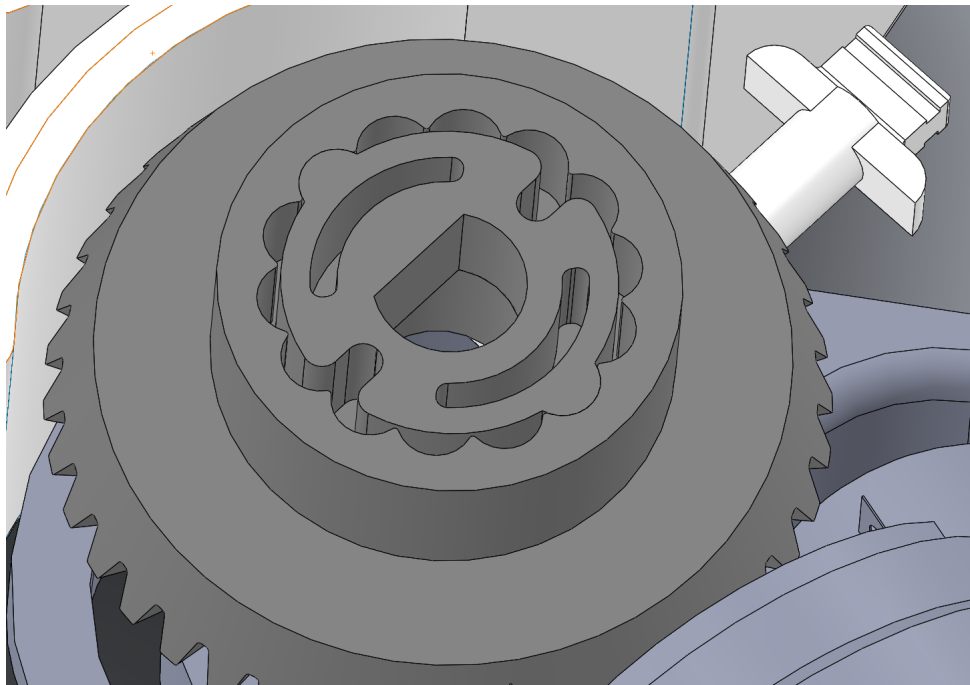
Clutch mechanism used to prevent gear damage
